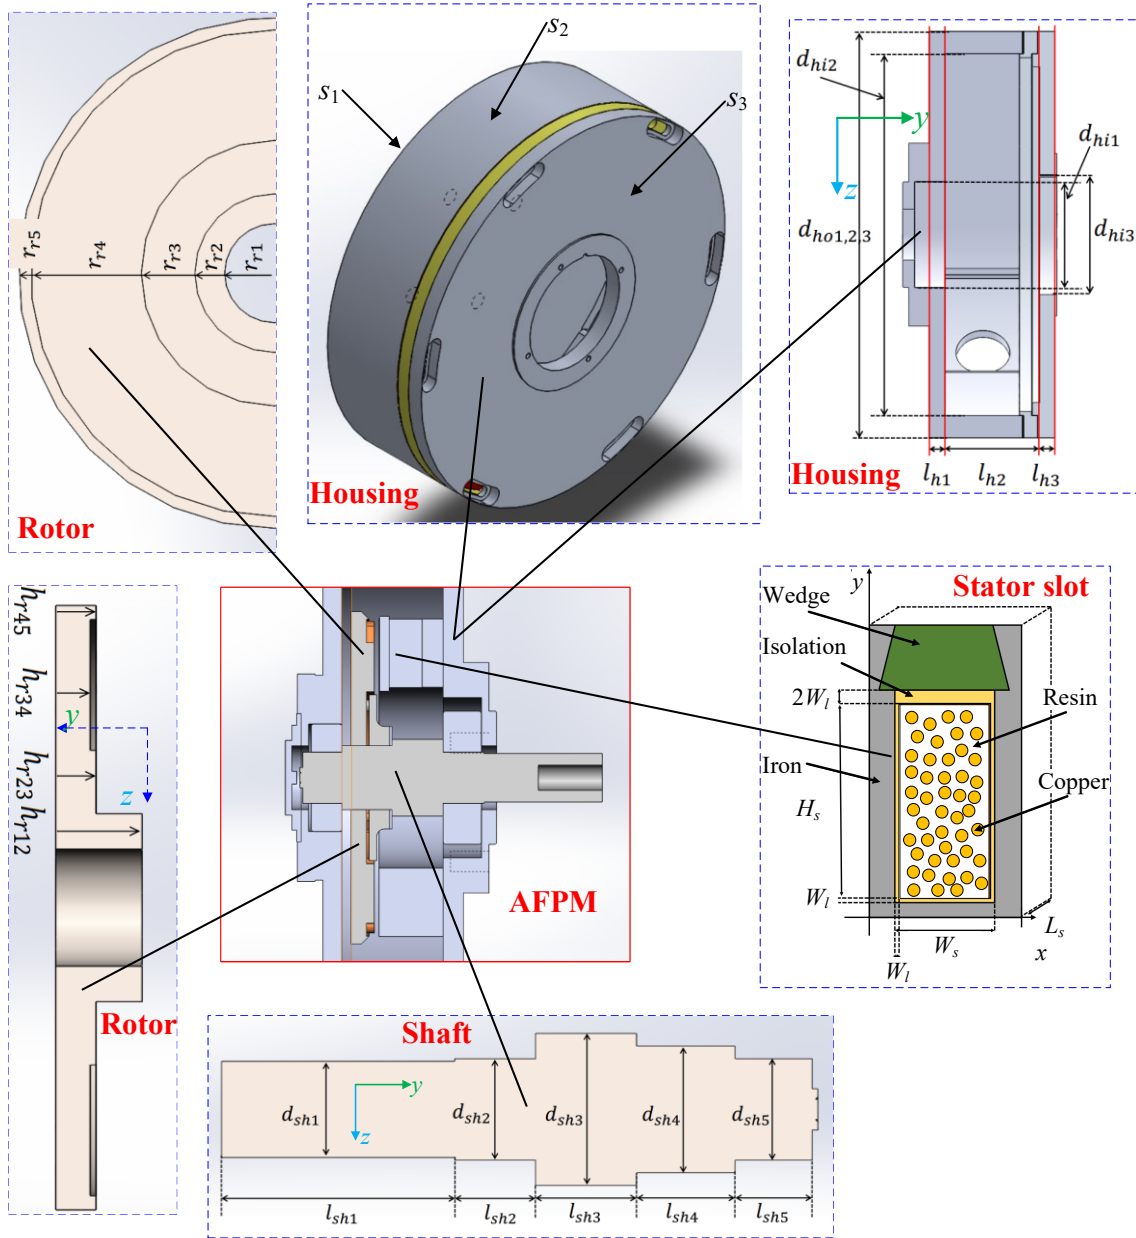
Cross-section and dimensions of the analyzed AFPM machine.
